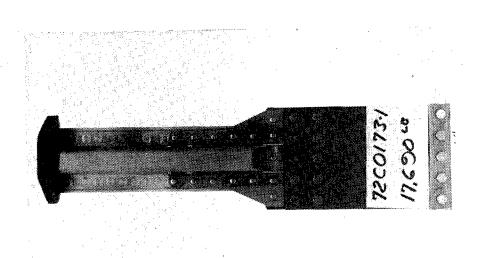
Spotwelded Compression Load Introduction Fitting after Testing.
